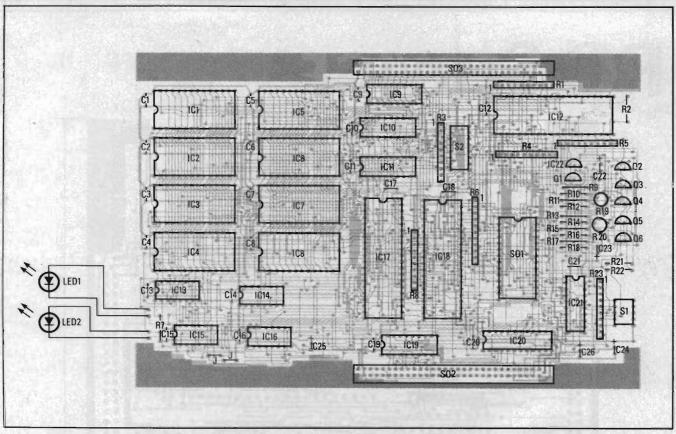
CONSTRUCTION OF THE MODULE is fairly straightforward. Use this Parts-Placement diagram when mounting the components.
